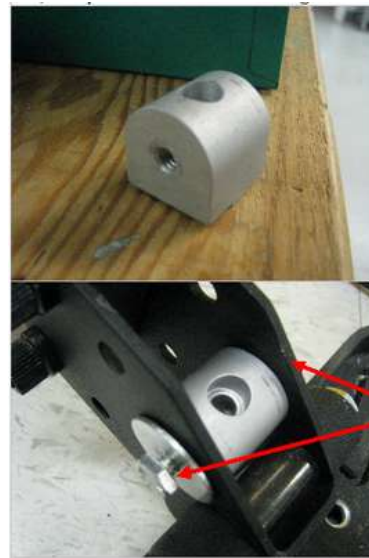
(top) 8020 connector (bottom) fitting the 8020 connector within the footrest height adjustment apparatus. You can secure it in via bolts on both sides.
